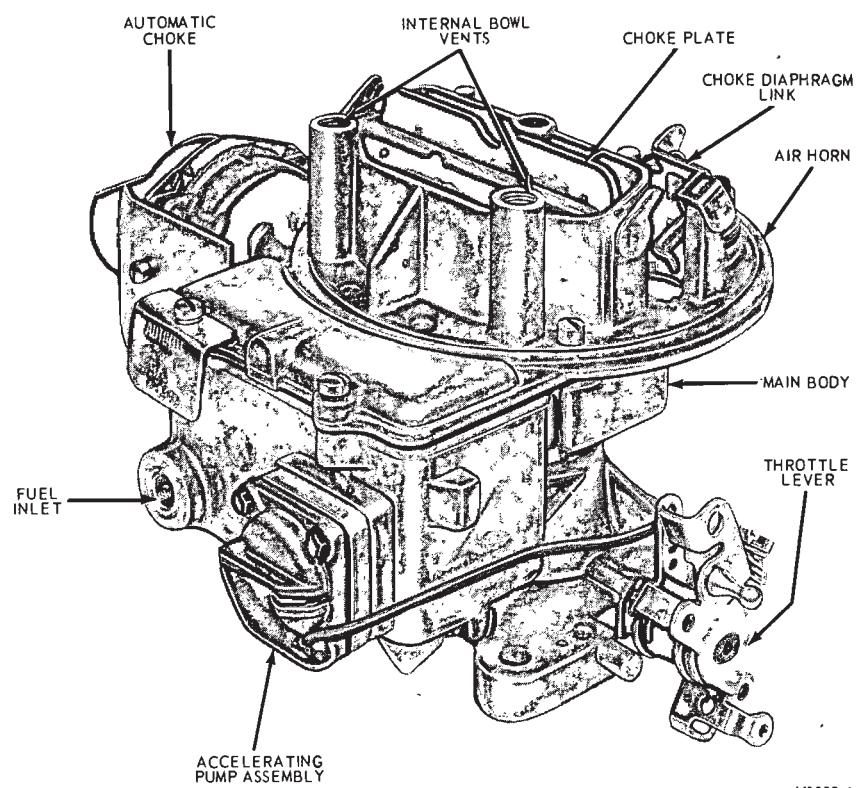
Autolite Model 2100-D 2-V Carburetor—Left Front 3/4 View
